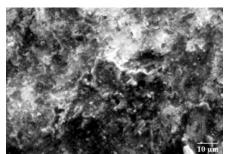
SEM image of the spark erosion machined Hasetlloy C-276 work surface
